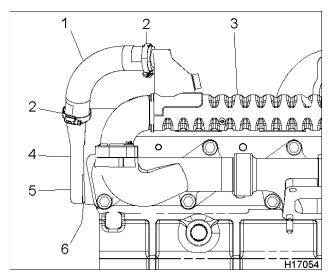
EGR coolant return tube adapter and EGR coolant hose
